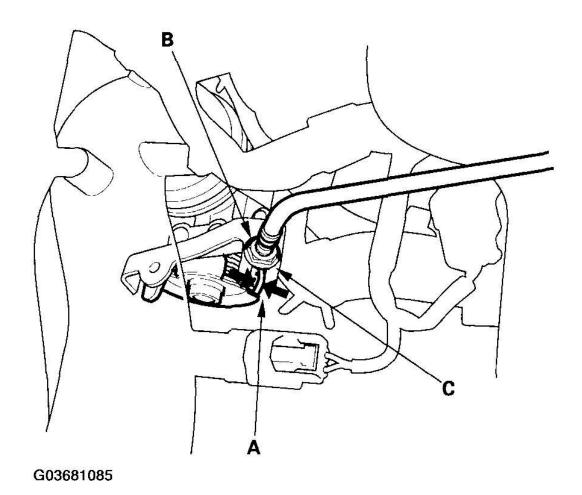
Checking Cable Free Play At Throttle Linkage Courtesv of AMERICAN HONDA MOTOR CO., INC.
